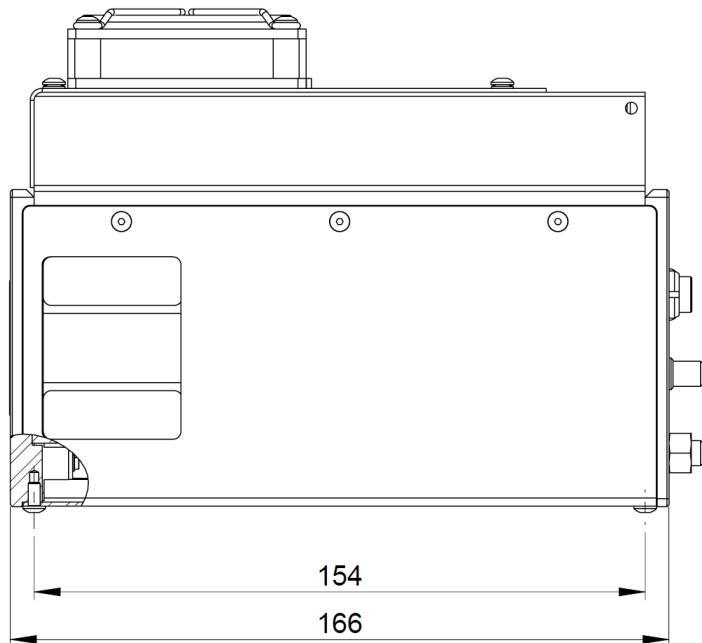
Mounting options on the Bottom of the PMA Hybrid Unit with pitch and dimensions
